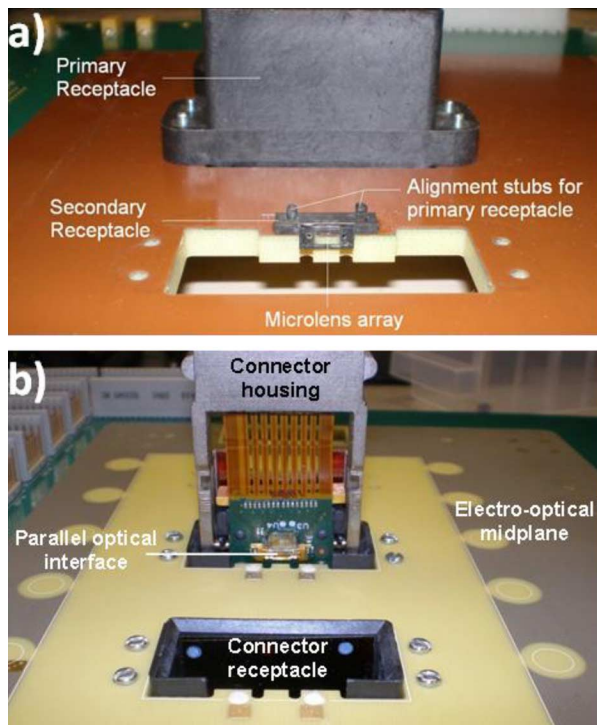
(a) Assembly of primary receptacle and secondary receptacle in optical engagement slots, (b) Pluggable optical connector prior to engagement with OPCB. Parallel MT compliant optical interface is visible as connector starts to engage with connector receptacle.
